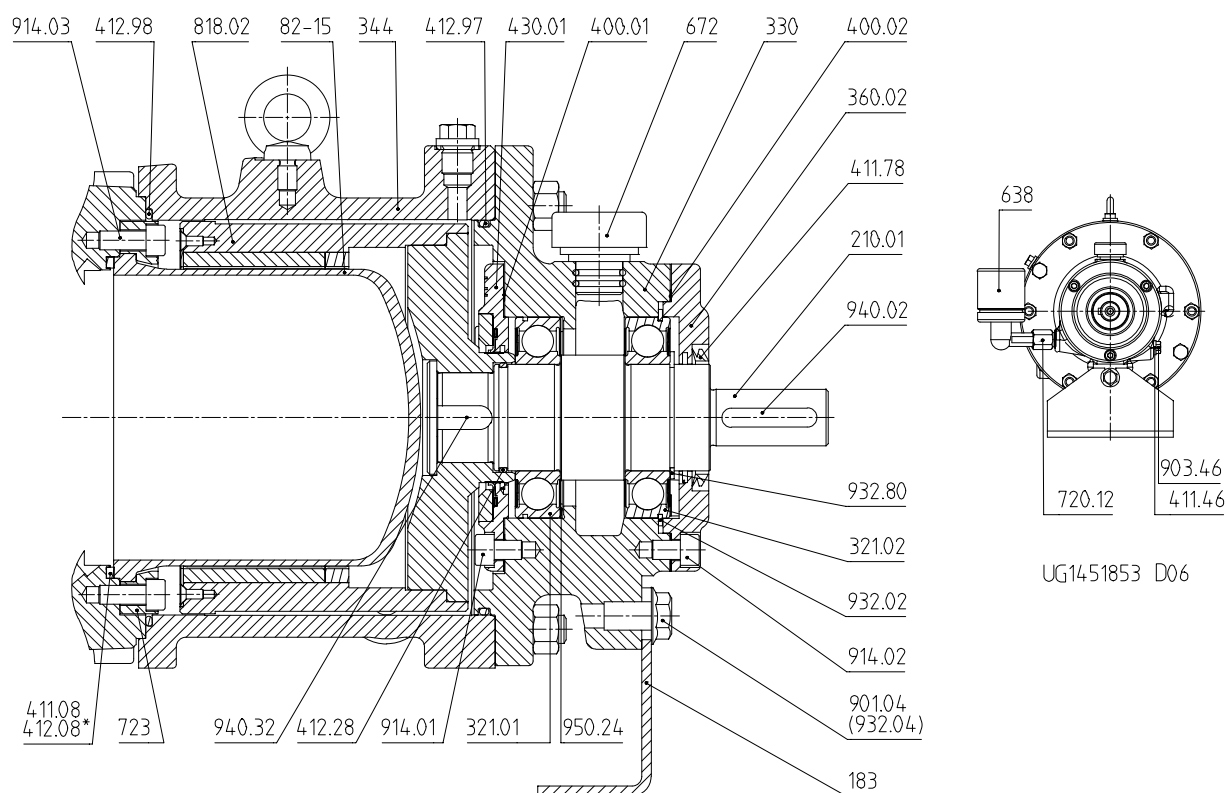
Model with bearing bracket with oil lubrication and shaft seal ring as leakage barrier
